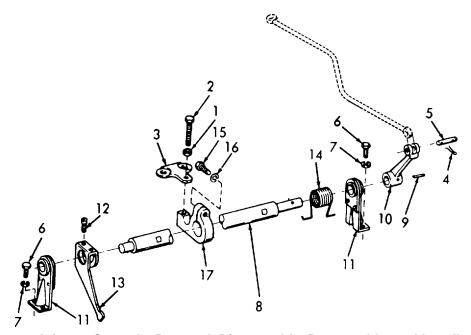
Injector Controls, Removal, Disassembly, Reassembly, and Installation.
